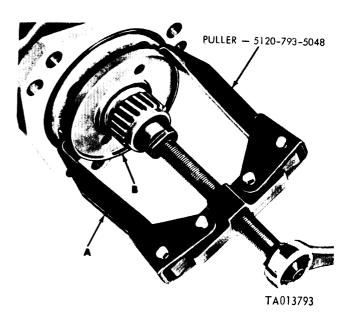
Removing timing device hub using puller – 5120-793-5048.
